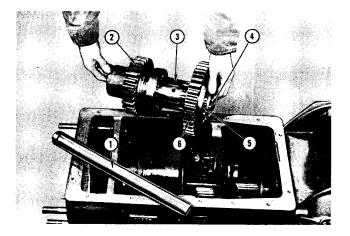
REVERSE GEARING, REMOVED 4. Thrust Washer and Pin
